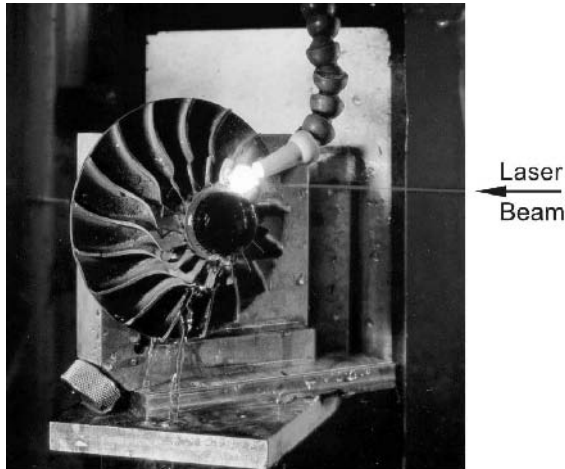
Aircraft engine compressor impeller in the process of being laser shock processed (courtesy LSPT, Inc.)
